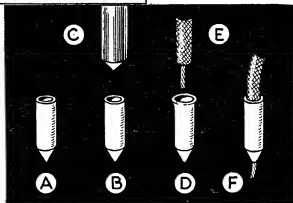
(A) Cable housing cap. (B) Beaken shank from an old drill bit (C), in position to flare open end of housing cap. (D) Flared housing cap ready for insertion of cable (E). (F) The finished job with the flared end of the housing cap pinched back to its original shape, gripping cable housing.
